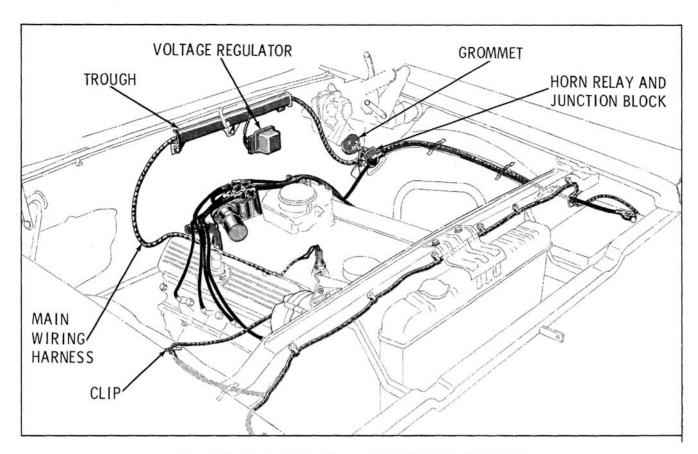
Chassis Wiring Harness (33-34-35-36-38 & 39 Series)
